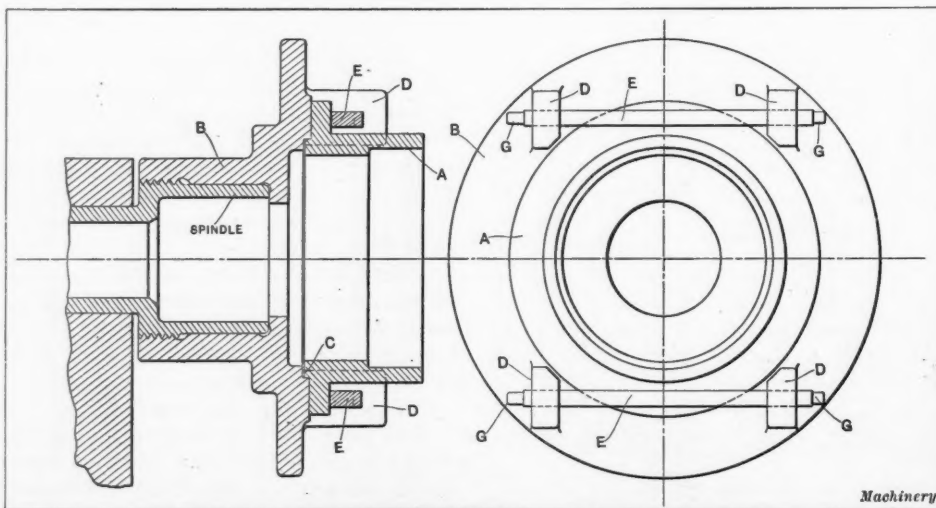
Quick-acting Clamping Fixture in which Wedges are used
